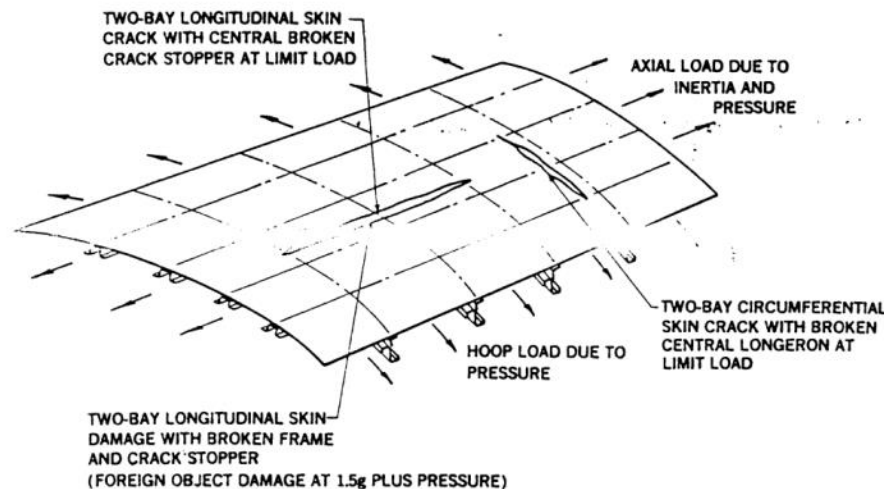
FUSELAGE DAMAGE TOLERANCE SIZES FOR STRUCTURAL DESIGN
